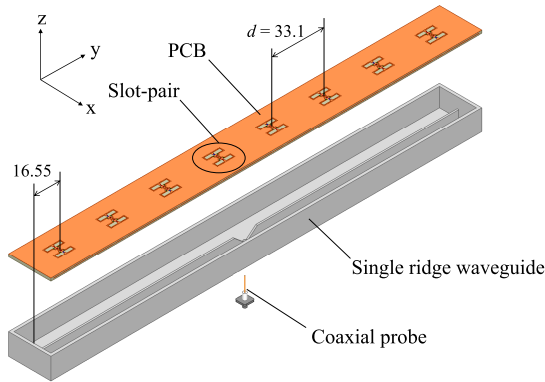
Exploded view of the prototype waveguide slot array (dimensions in millimeter).
